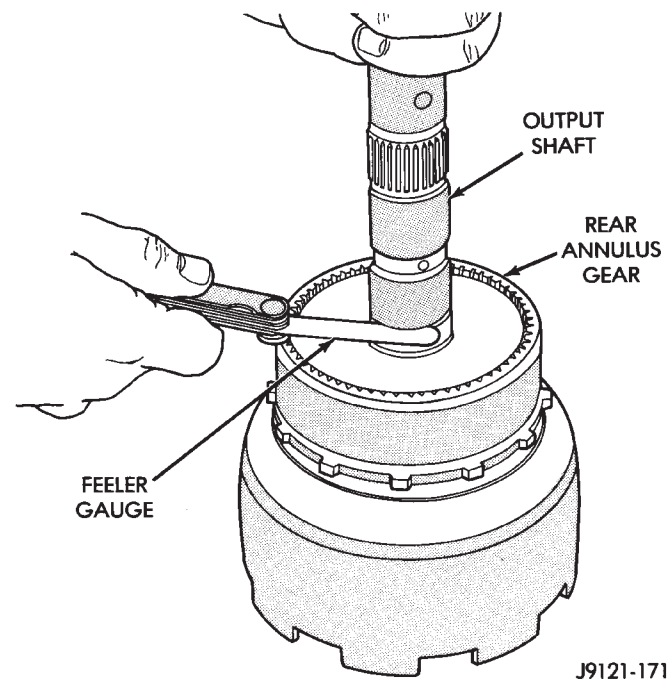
Checking Planetary Geartrain End Play OVERDRIVE UNIT
